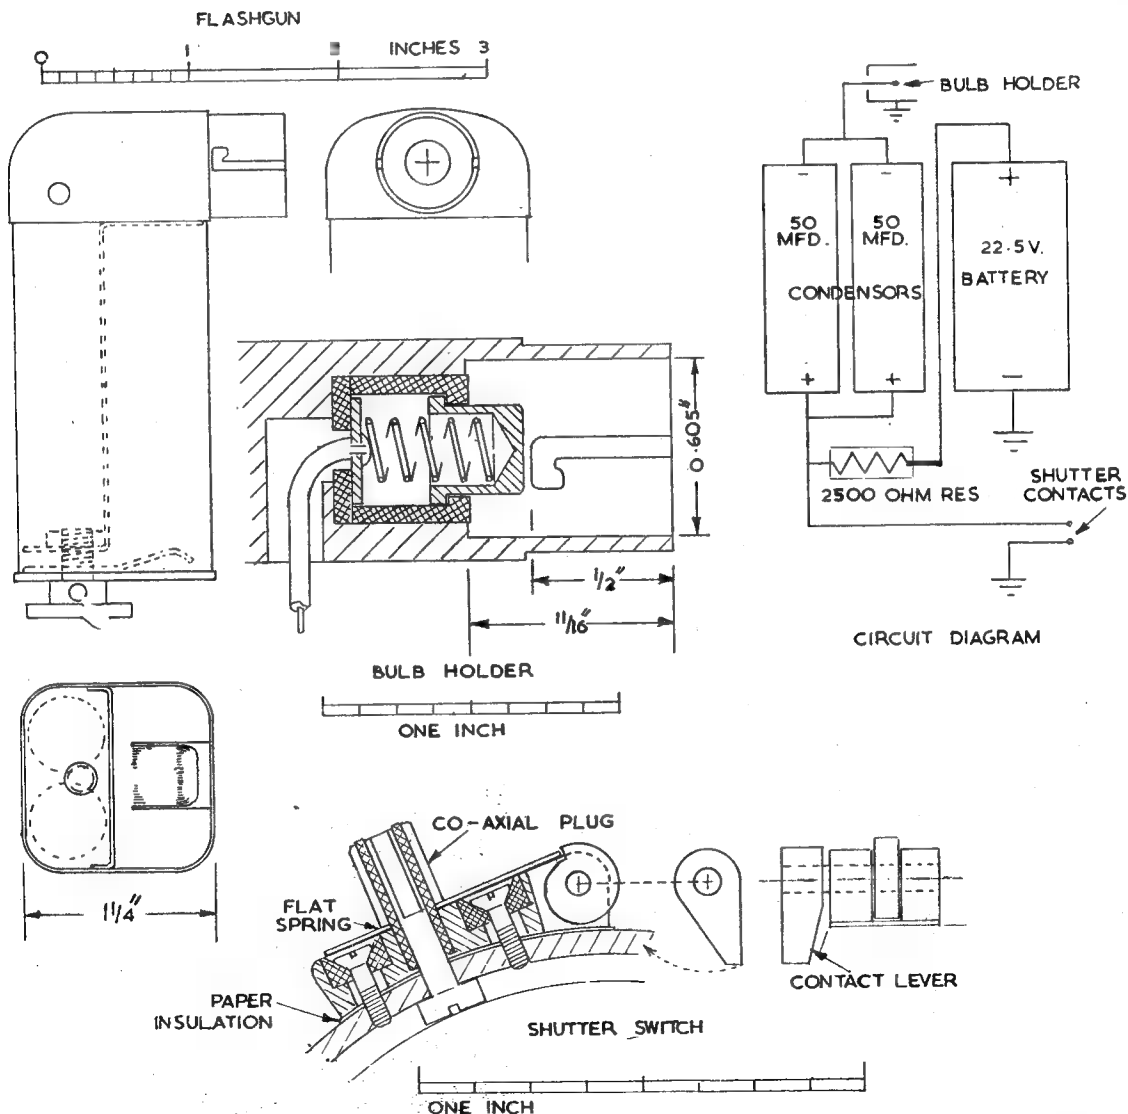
General arrangement of flashgun with details of bulb holder, shutter contact and circuit diagram
